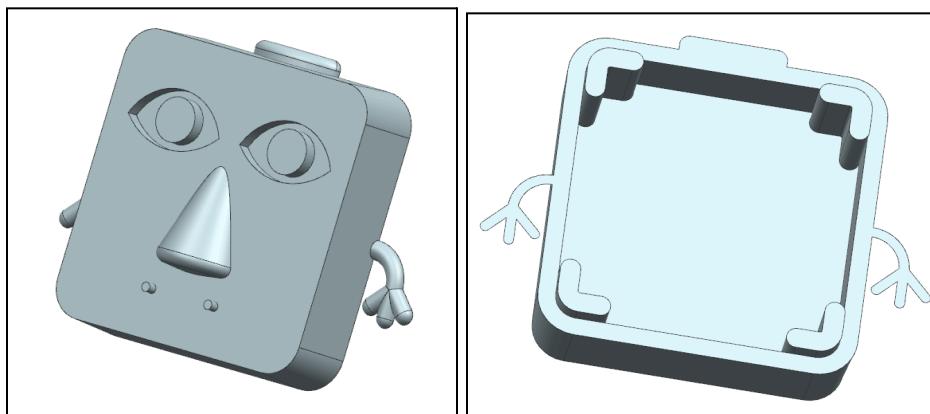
CAD model of top body (left) showcasing pins for mustache attachment and bottom body (right) showcasing L-columns for assembly.
